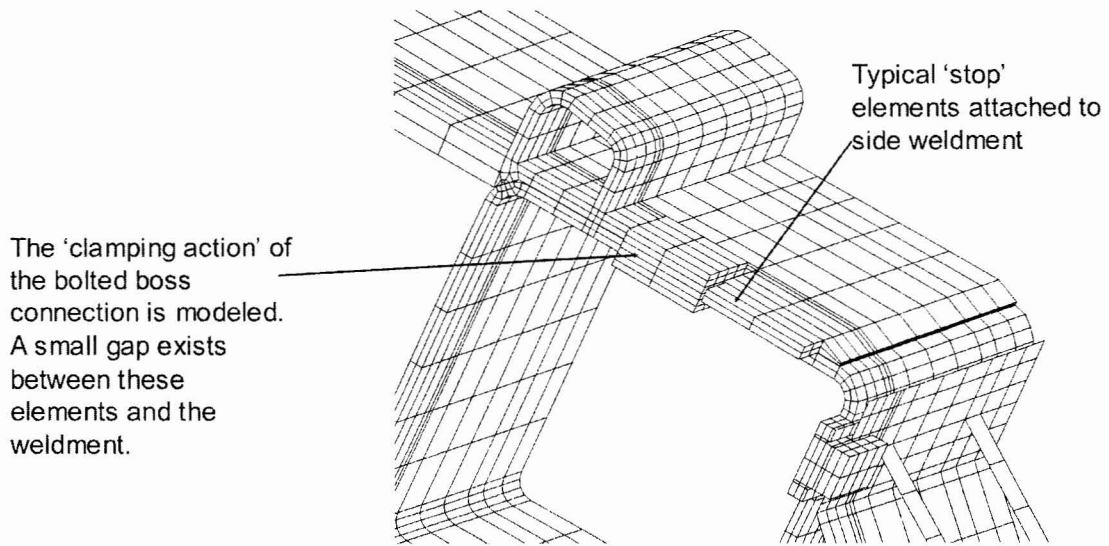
Details of a Typical Boss for the 87 Fuel Assembly BWR Basket Model
